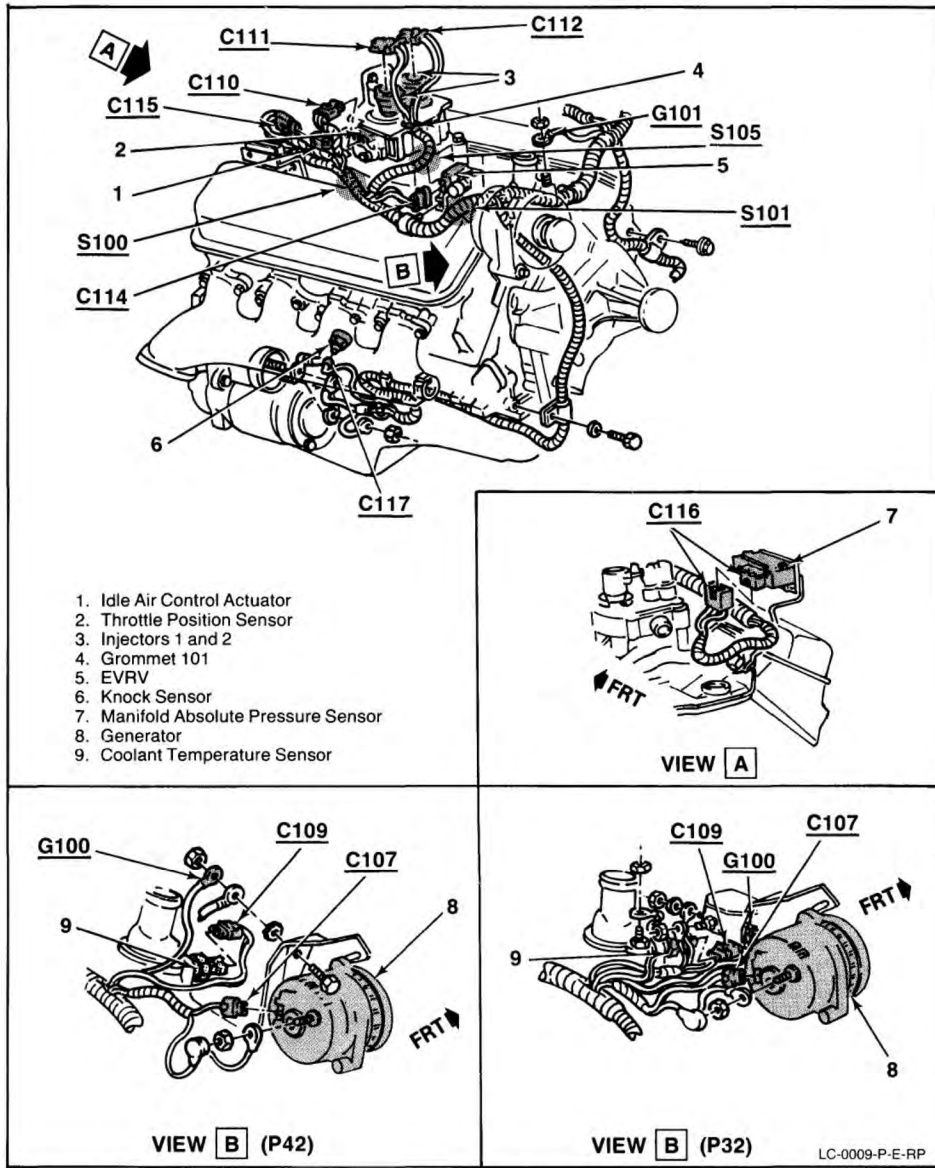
Engine Wiring Harness, RH Side (RPO L19 w/P32, P42)
